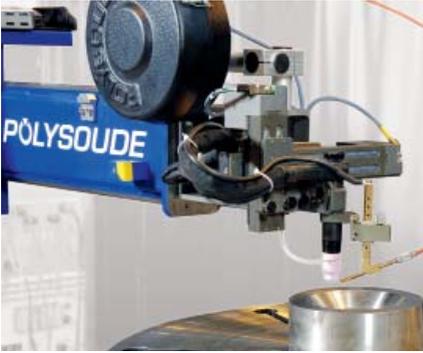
Example of an installation designed for cladding nozzle end-pieces
